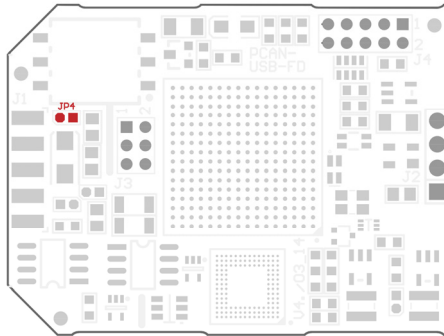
Top view PCAN-USB FD board, solder field JP4
